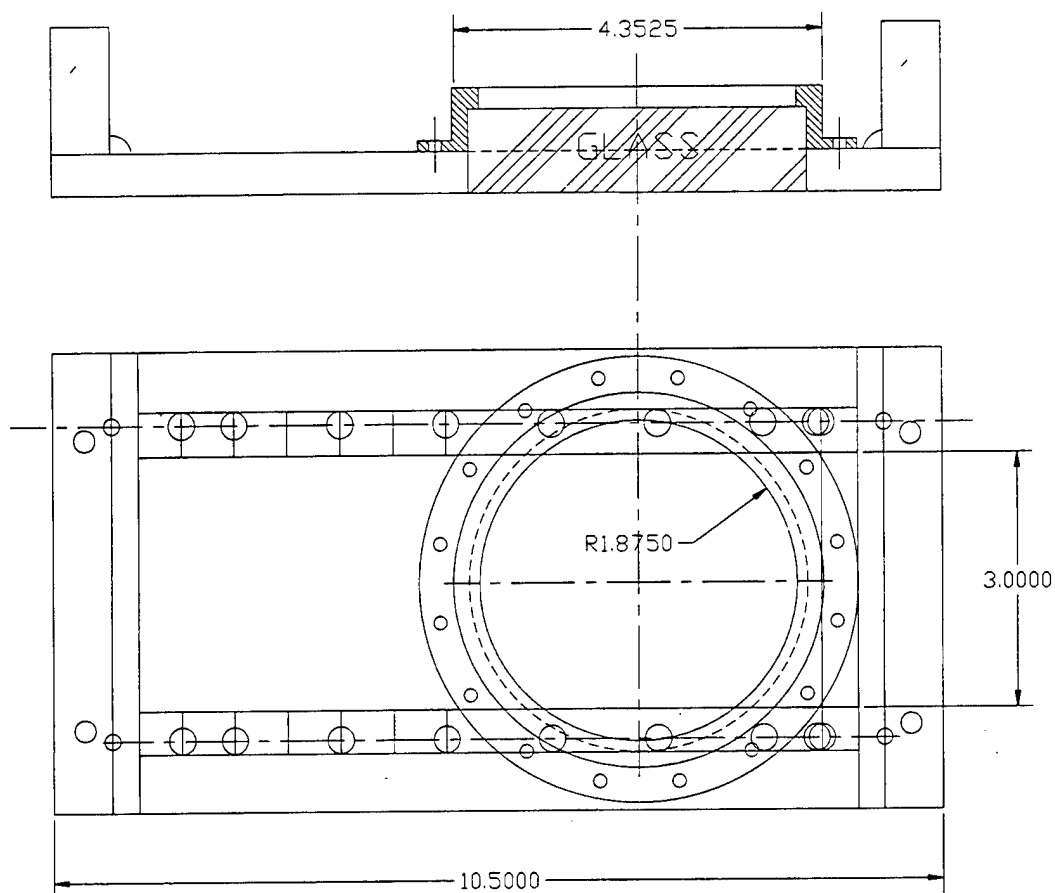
Wind tunnel test section wall with windows (dimensions in inches).
